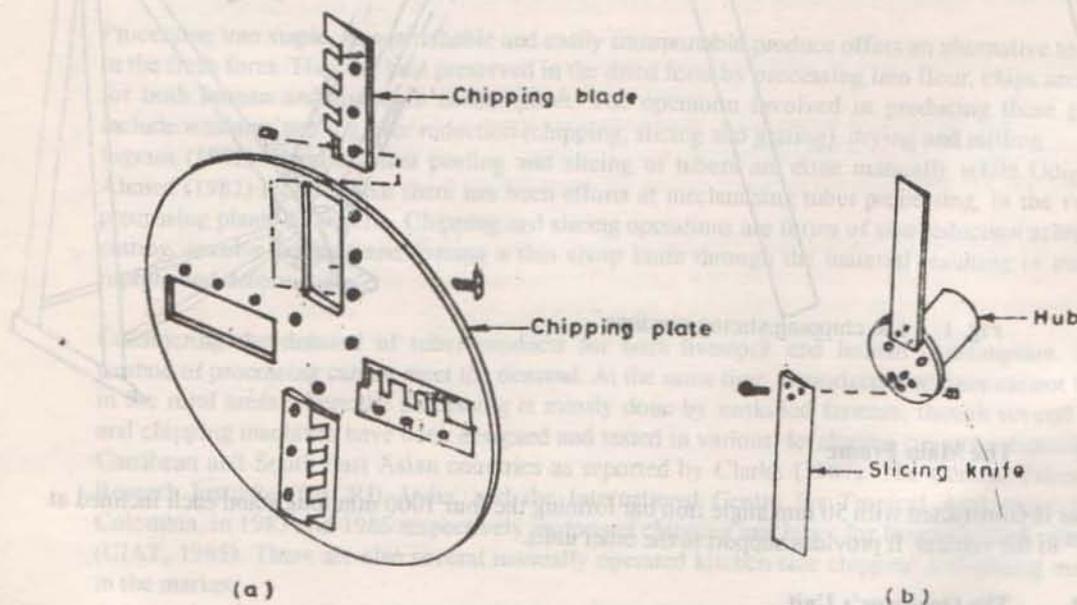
The cutting mechanisms (a) chipping (b) slicing
